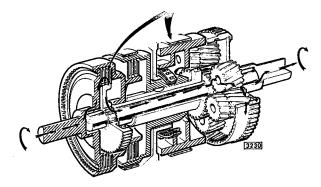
Mechanical power flow—First gear (Lock-up) selected
